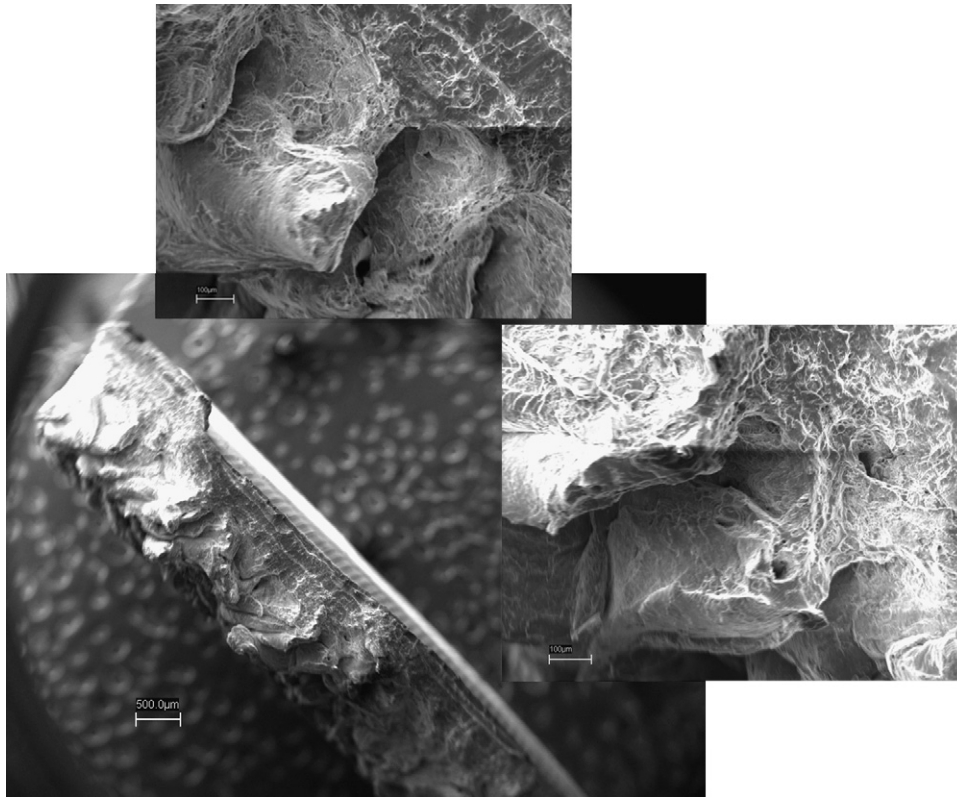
Fracture surfaces of the fatigue specimen (welding speed of 56 mm/min) tested at 80 MPa.
